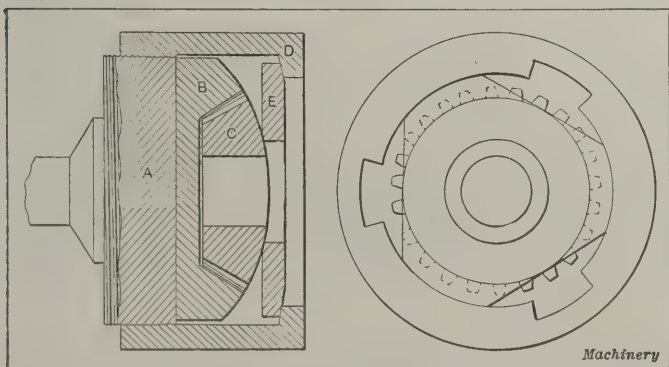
Special Chuck for holding Bevel Gear Pinions for Grinding the Holes
